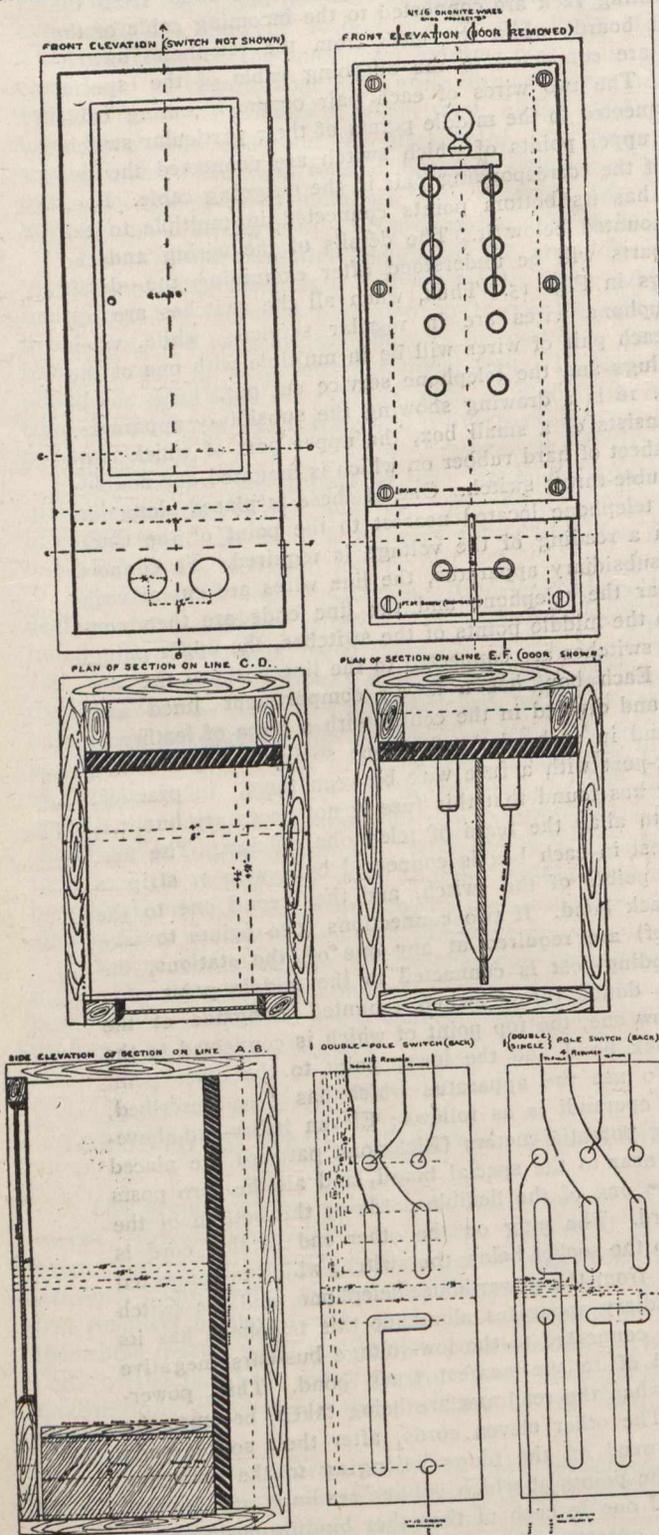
Station Switch and Fuse Boxes, Testing System.
